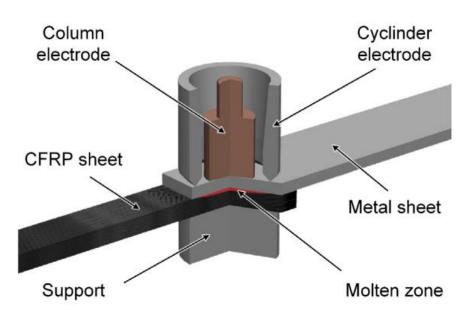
Schematic of the coaxial one-side resistance spot welding process.[10]
